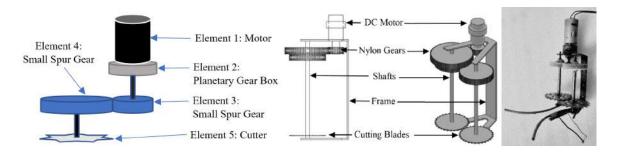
Cutting Head (a) Schematic (single cutter view), (b) General arrangement, and (c) fabricated
